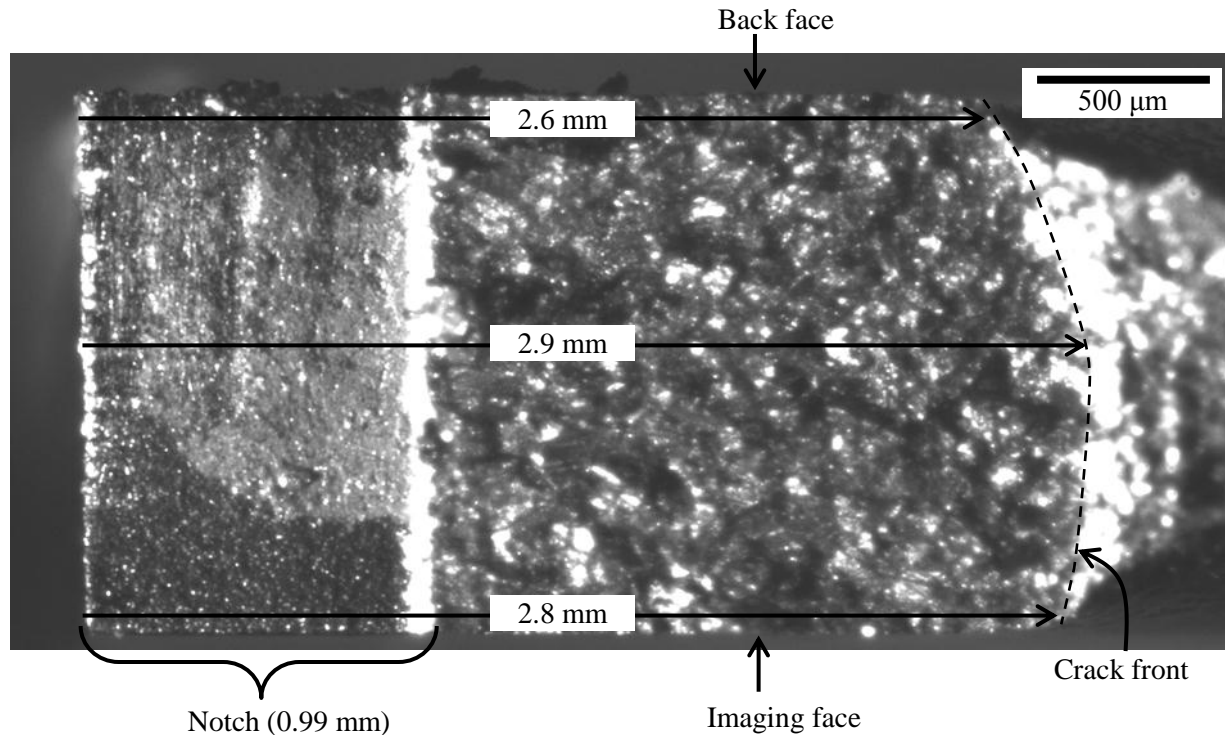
Fracture surface of the specimen (bottom half). The notch is on the left and the fatigue crack runs from the right end of the notch to the “crack front” line.
